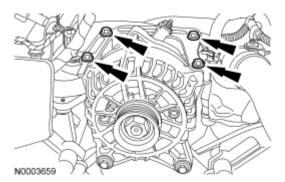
Generator & Bolts Courtesy of FORD MOTOR CO.
